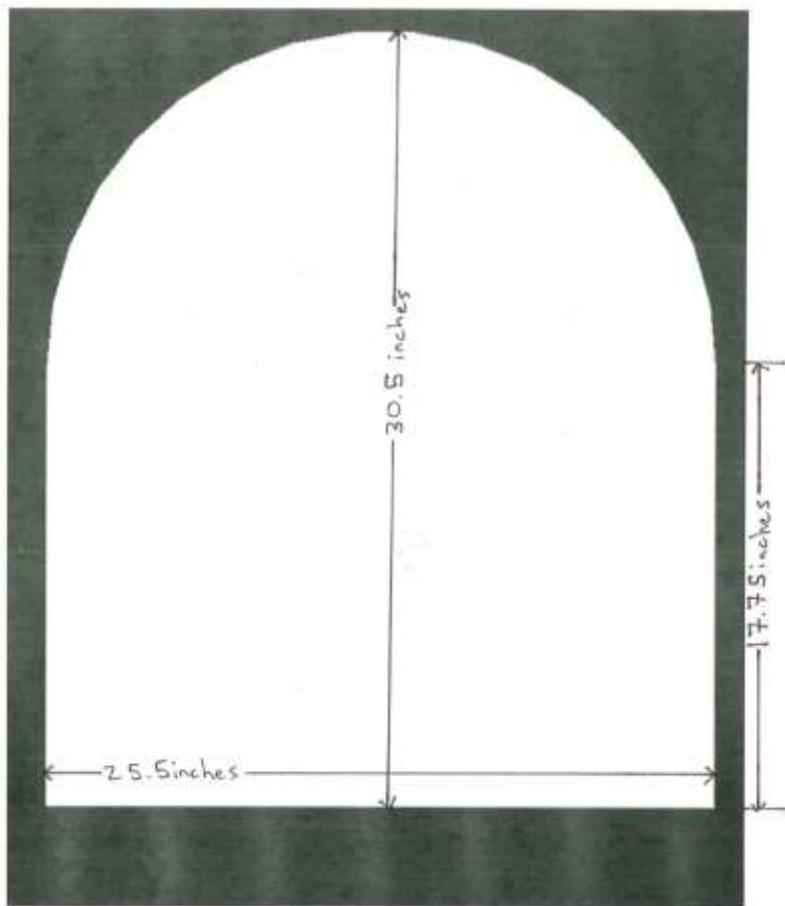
Dimensions of rear door hatch in the back of the nacelle.
